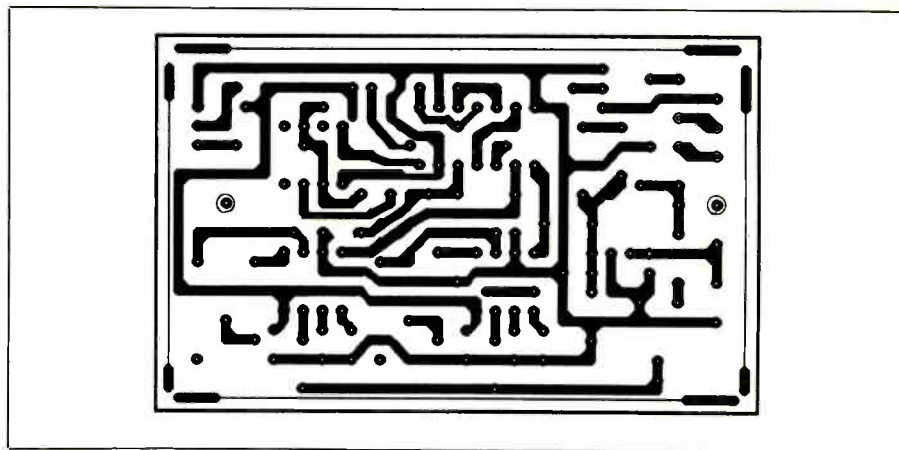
Actual-size etching-and-drilling guide for pc board.
